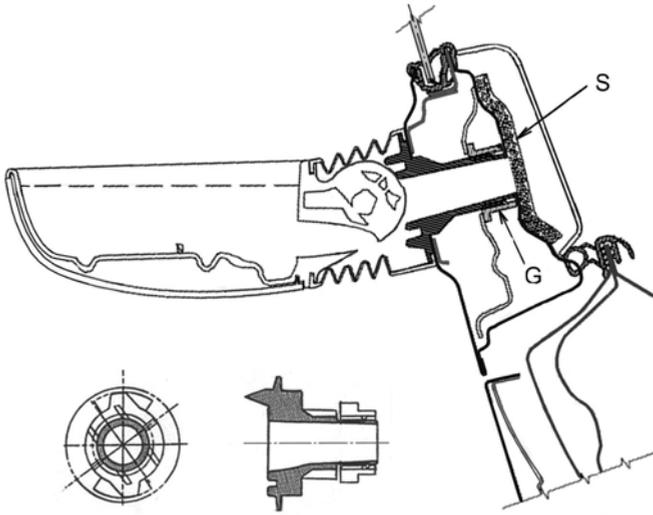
Example of mirror section, with G clamp ring nut detail; S is a noise insulating cloth.
